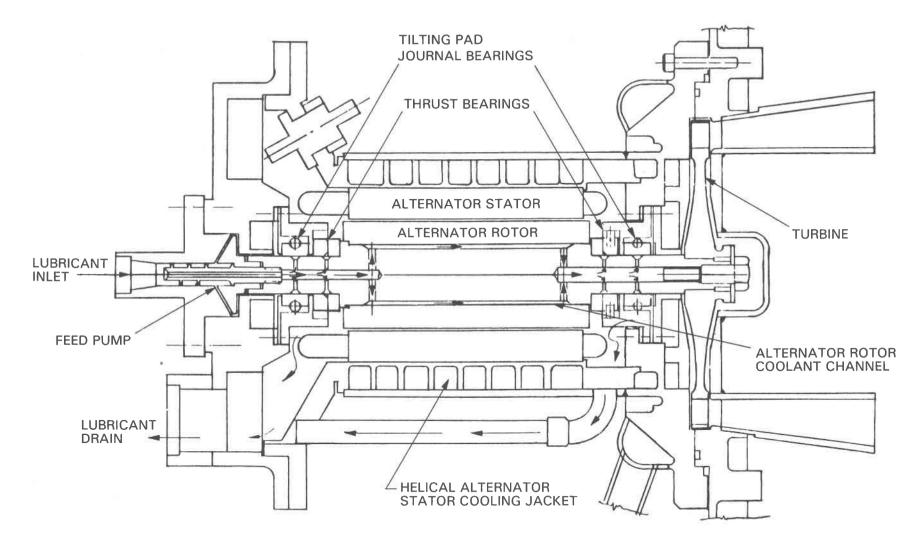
Original Bearing Lubrication Design (Barber-Nichols)
